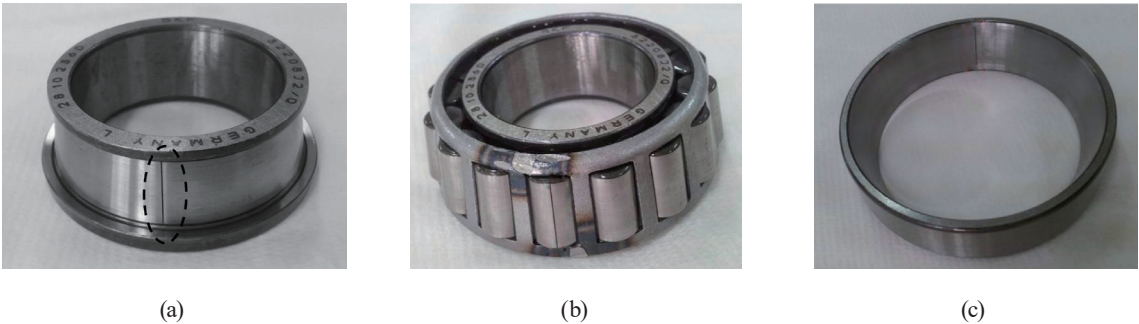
(Color online) Bearing with damaged parts caused by electrical discharge machining. The linear damage is highlighted in circles. (a) Inner ring, (b) roller, and (c) outer ring.
